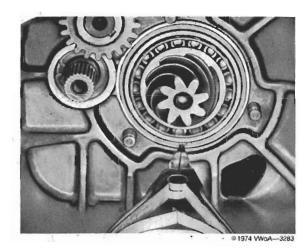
Circlip pliers being used to remove the large circlip that surrounds the double tapered-roller pinion bearing on early transmissions.
